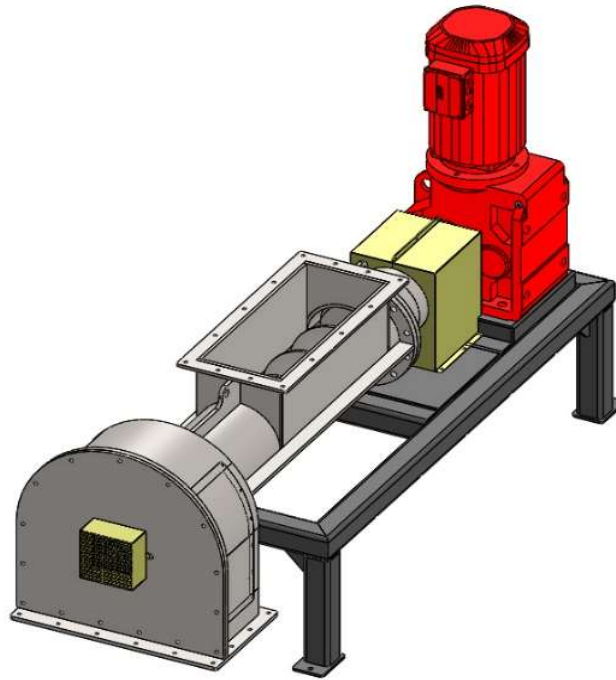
Hansek Maschinenbau circular disc mill HSM 300 (Hansek Maschinenbau GmbH, 2020)
